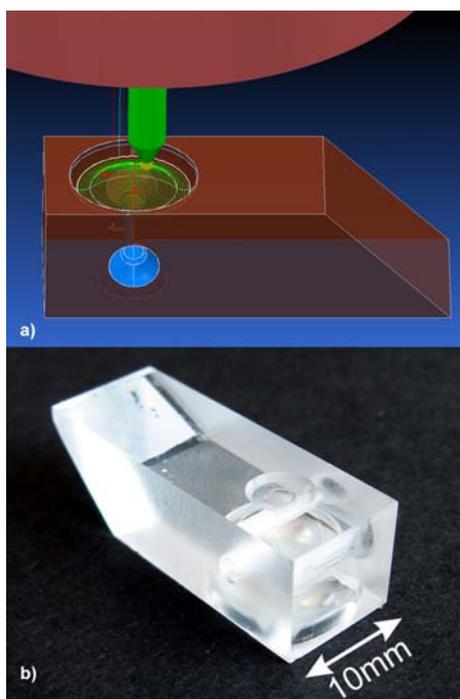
a) CAD/Cam software is used for generating the paths of the tool and b) fabricated system in PMMA by micro milling.
